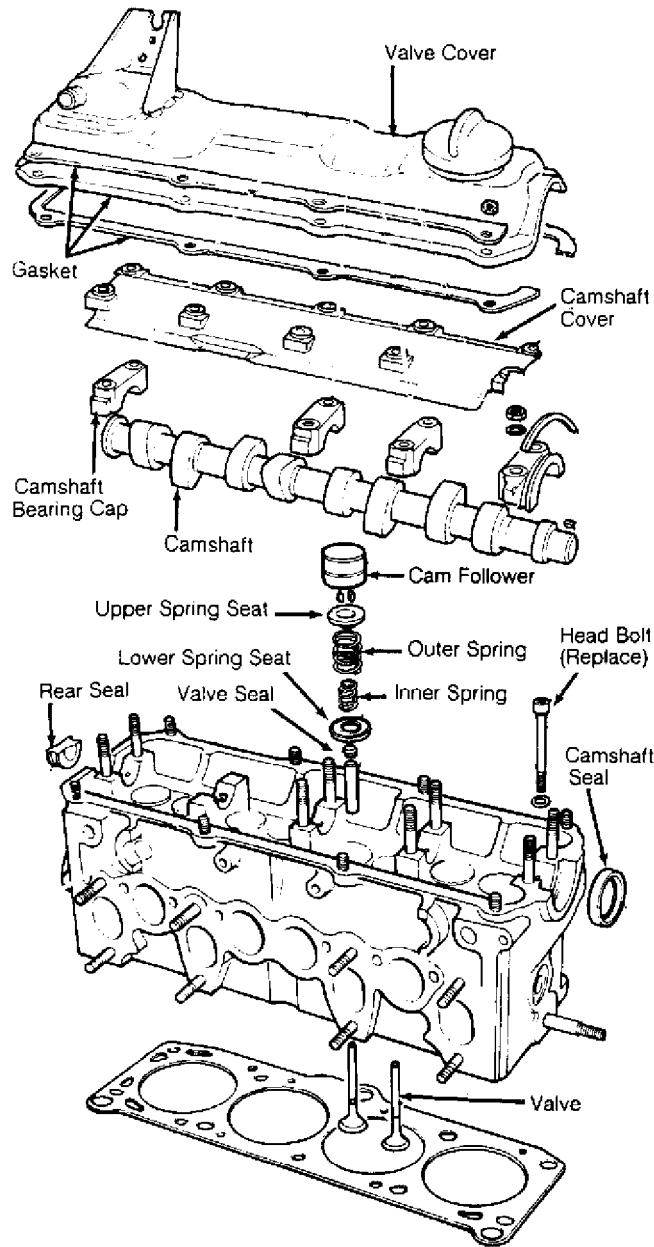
Identifying 1.8L Cylinder Head (8-Valve)
